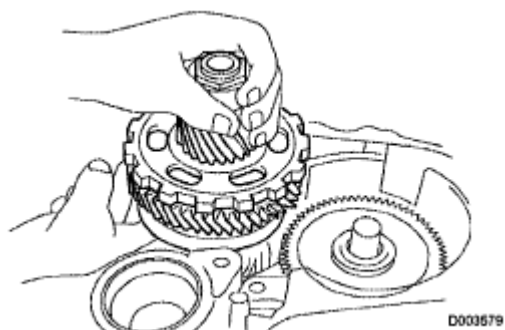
Installing U/D Planetary Gear Assembly To Transaxle Case
